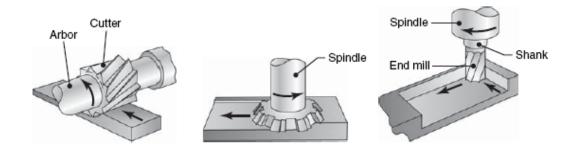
(a) Peripheral milling, (b) Face milling and (c) End milling [7]
